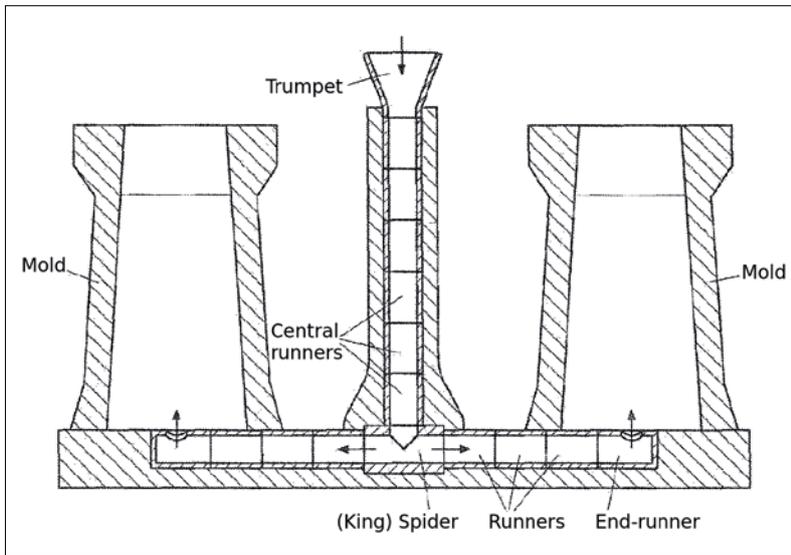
Exemplary refractory pipe system used in bottom teemed steel ingot casting after Ritter et al. [6, Fig. 1]
